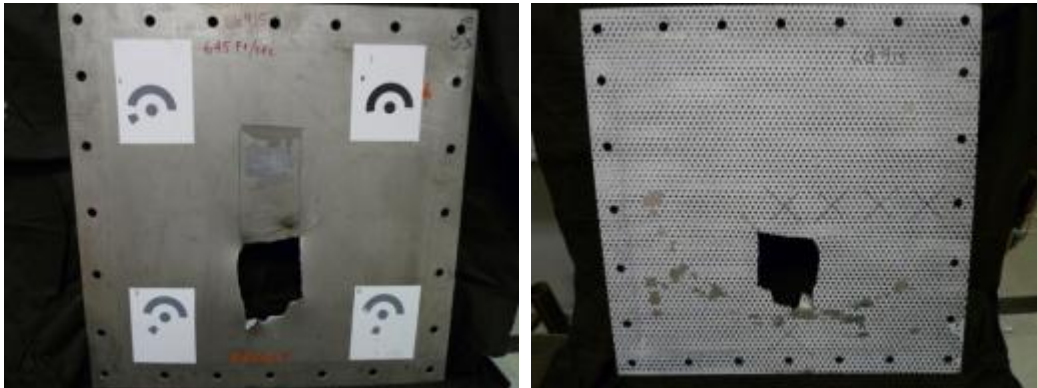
Large Ti-6Al-4V Test Panel, front and back side, test LG915.
